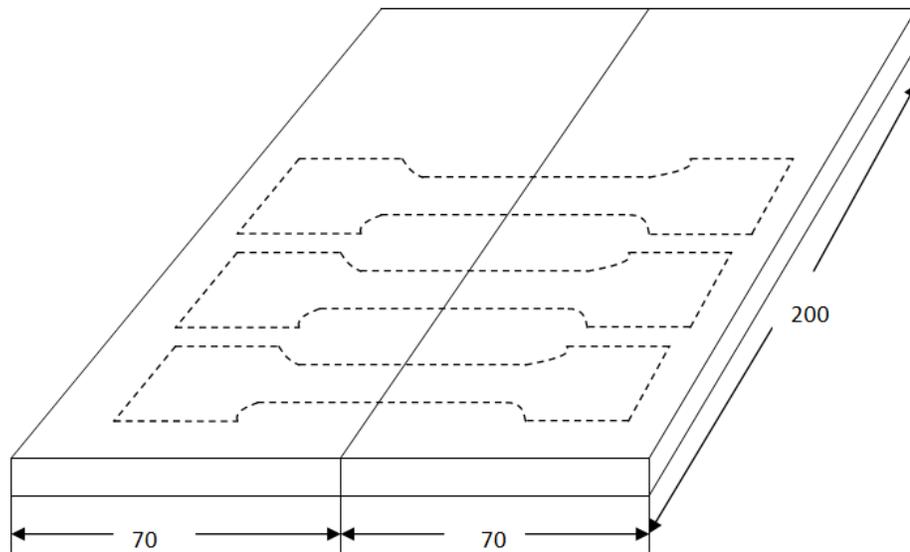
Schematic view of the FS Welded Joint with the extraction of tensile specimens
